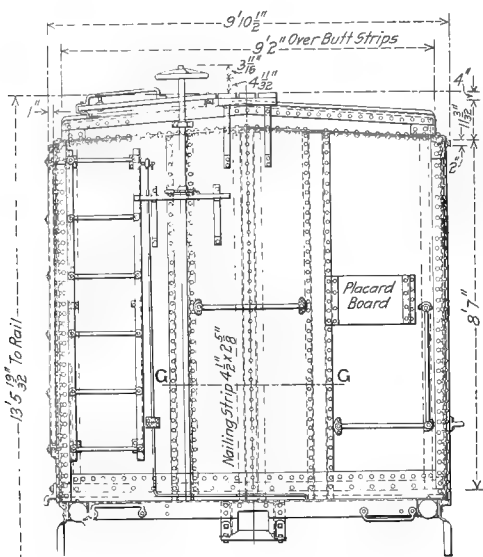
End Elevation and Cross Sections of Pennsylvania Railroad Steel Box Car Shown in Figs. 7, 262, 264 and 265.
